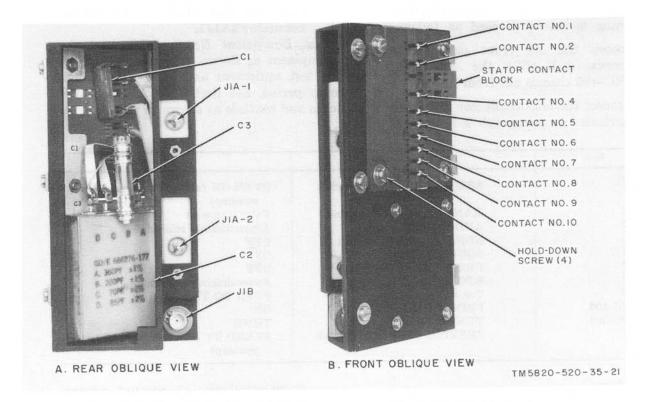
Stator assembly 2A9, mechanical alignment and component location.
